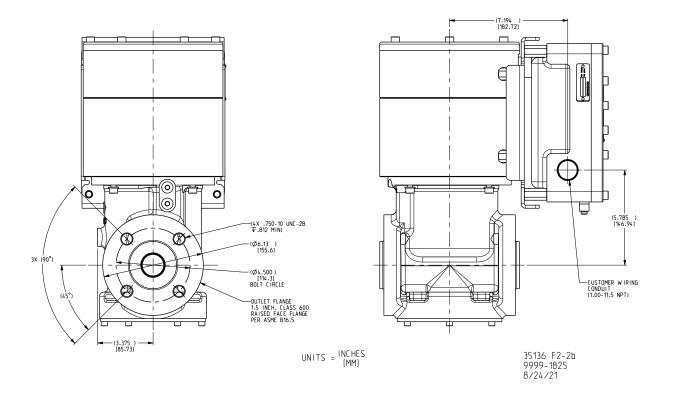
Outline Drawing Stainless Steel GS40 with Conduit Entries
